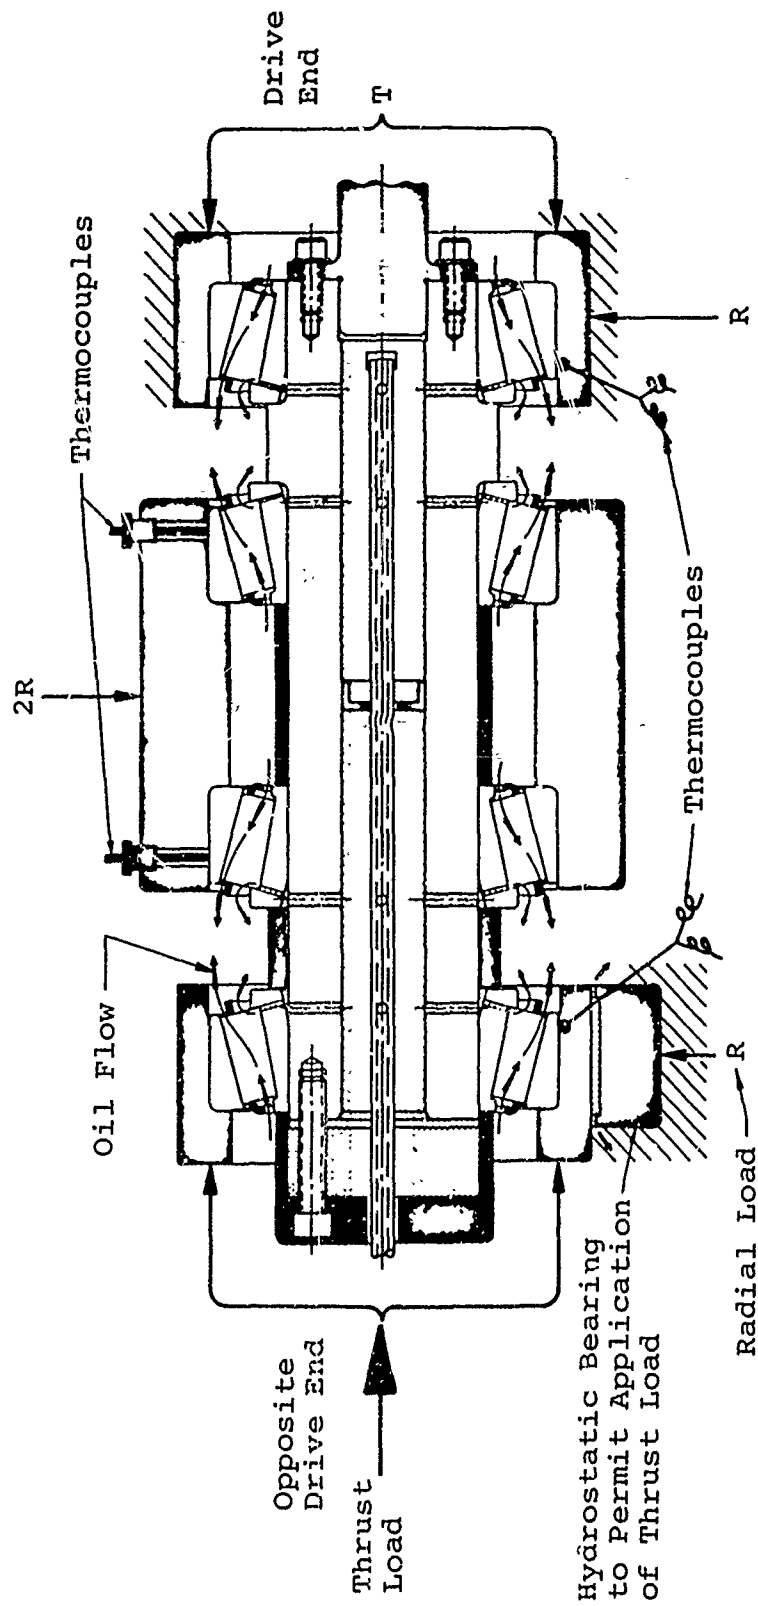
Schematic Diagram Showing Thermocouples, Lubrication System and Bearing Loading System. (Drive end bearing cup adapter is fixed. Opposite drive end bearing cup adapter is free to move axially on hydrostatic bearing.)
